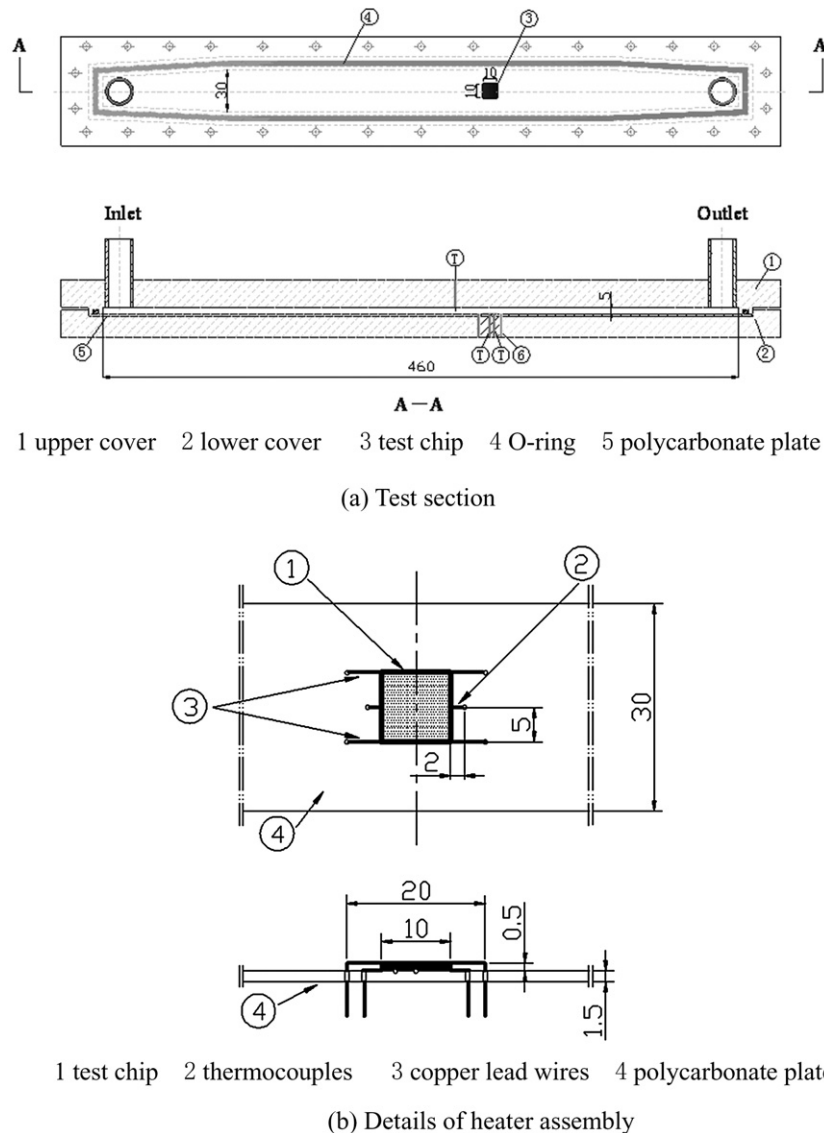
Schematic diagrams of test section and heater assembly. (a) Test section. (b) Details of heater assembly.
